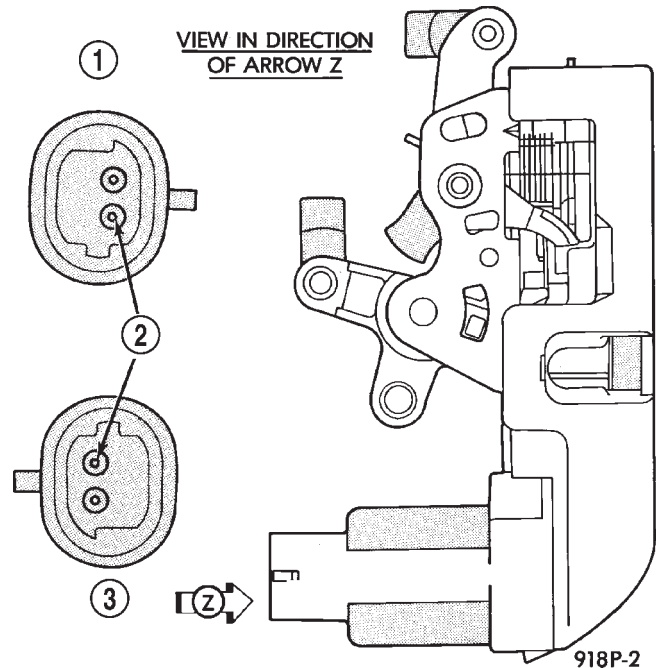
DOOR LOCK MOTOR - TYPICAL
